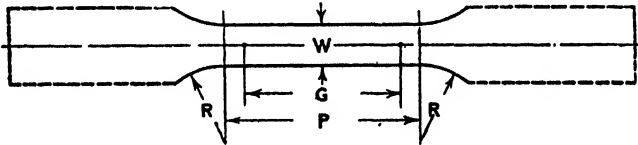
BRITISH STANDARD FLAT TEST PIECES
